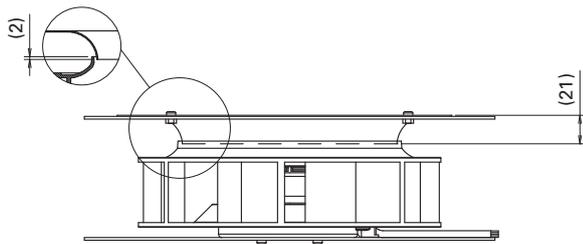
Example of the "San Ace C221" 9TP type and inlet nozzle mounting dimensions (unit: mm)
